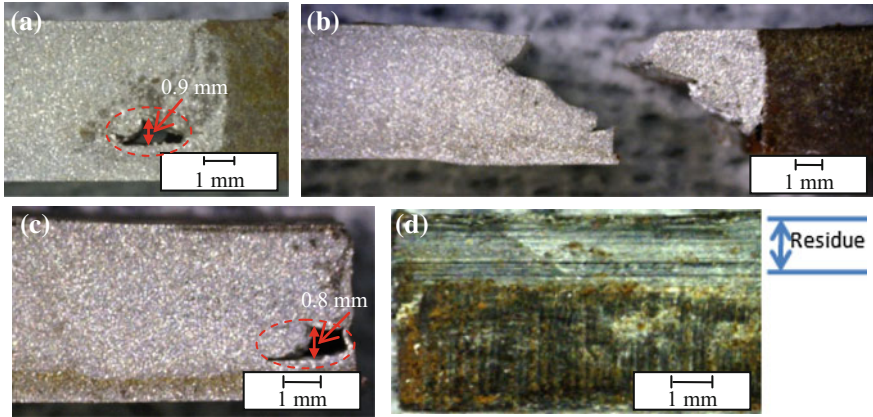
Tensile specimen side views a T3 before failure, b T3 after failure, c T4 after failure and d steel fracture surface view of T4 after failure
